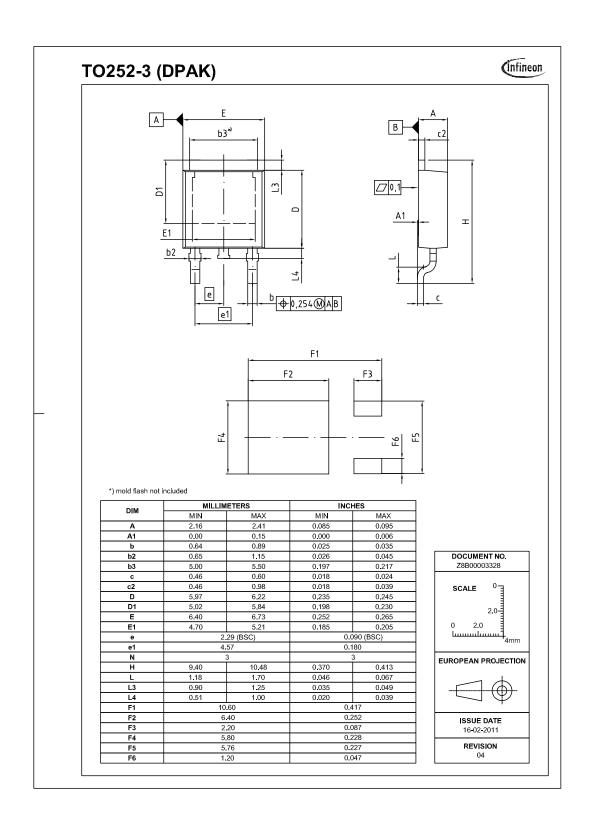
Outline P-TO252-3, dimensions in mm/inches
